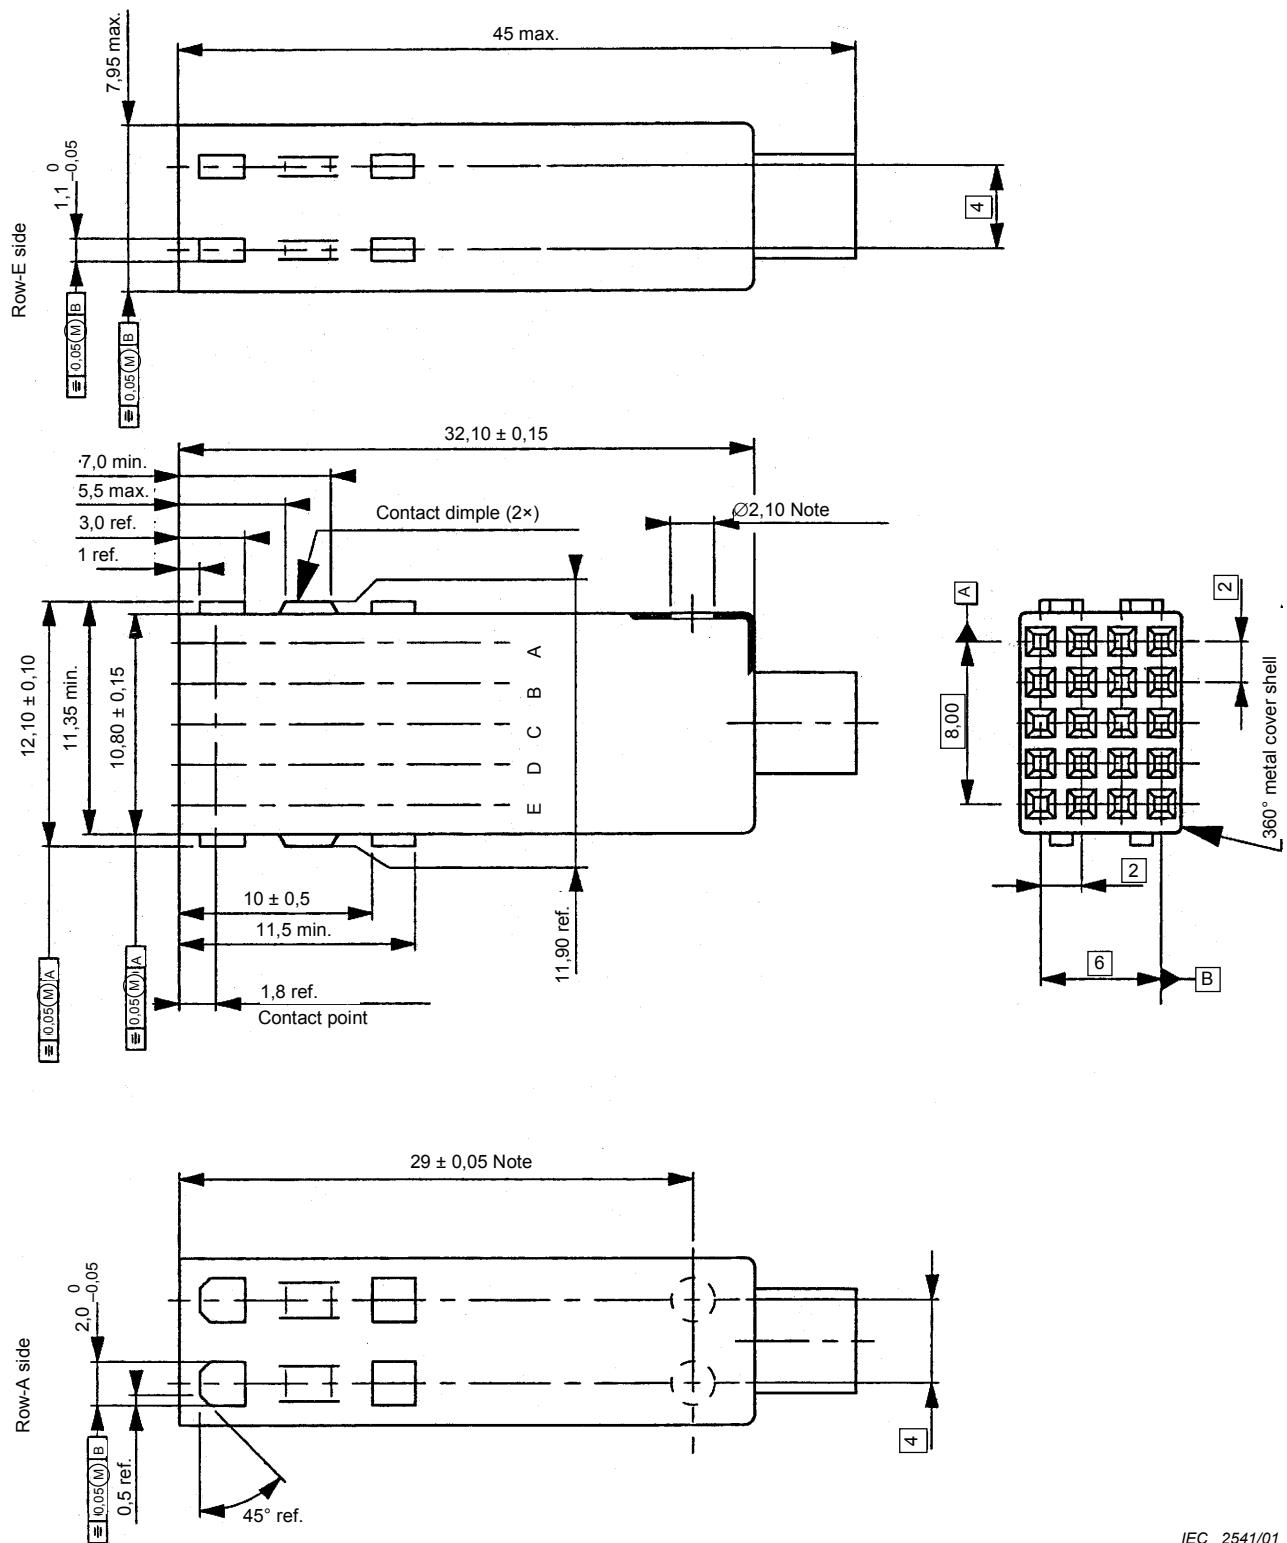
Dimensions of the free connector (5 × 2) contacts
